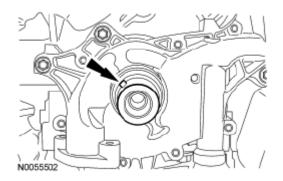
Identifying Crankshaft Position Courtesy of FORD MOTOR CO.
